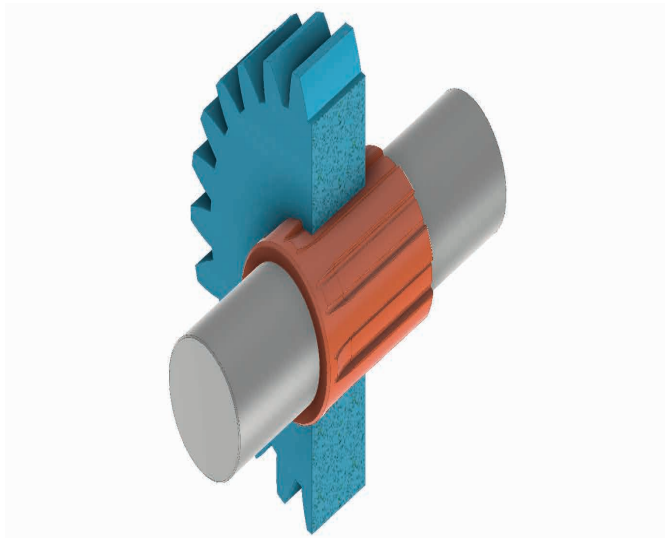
Schematic representation of the spur gear, splined bush, and shaft assembly
